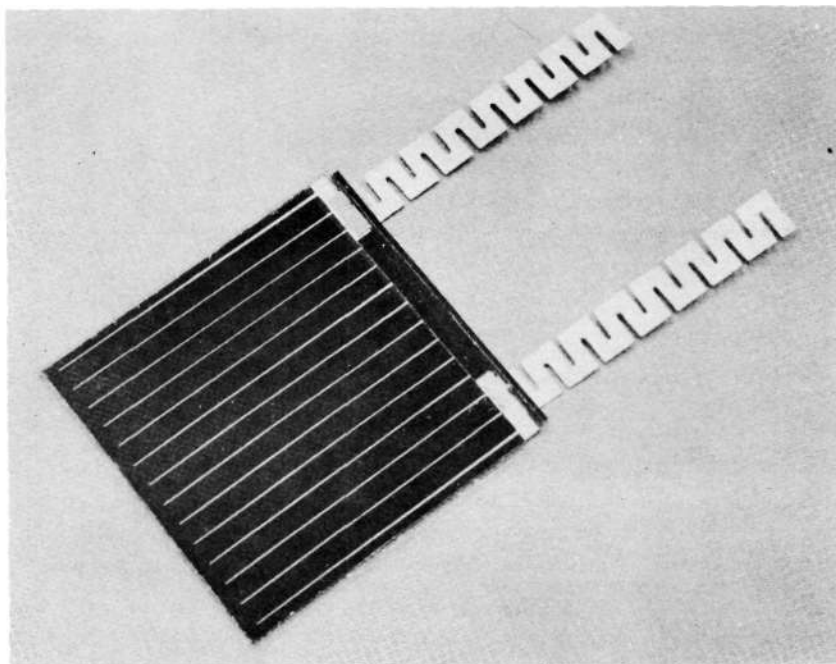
TRW Welded Aluminum Interconnector Configuration (From Reference 15)
